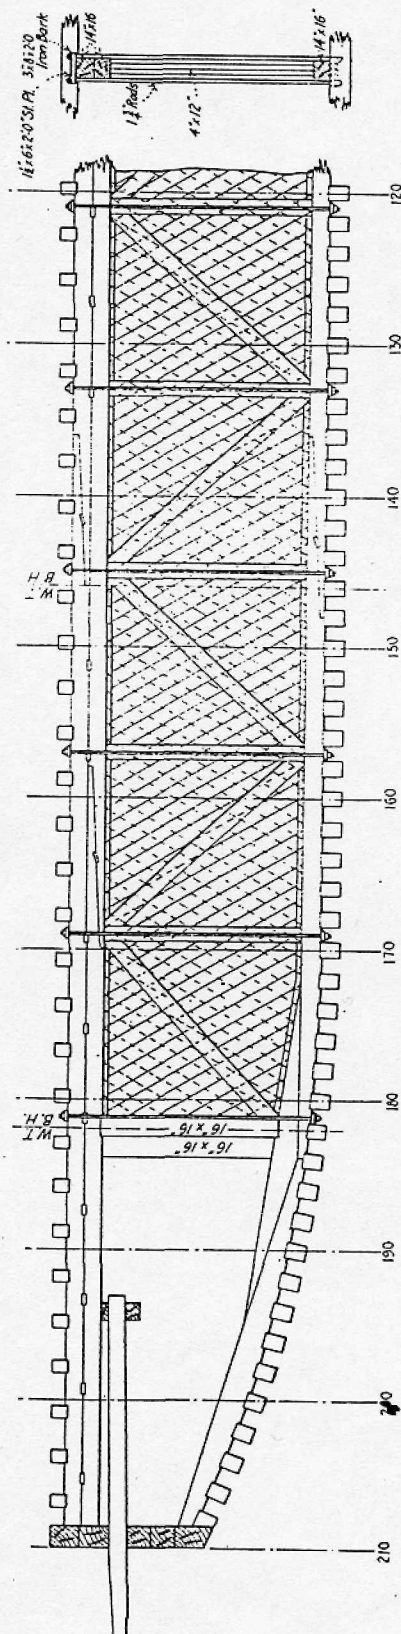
Construction of Longitudinal Bulkheads, Located 6 Feet and 18 Feet, Respectively, from Centerline of Ship
